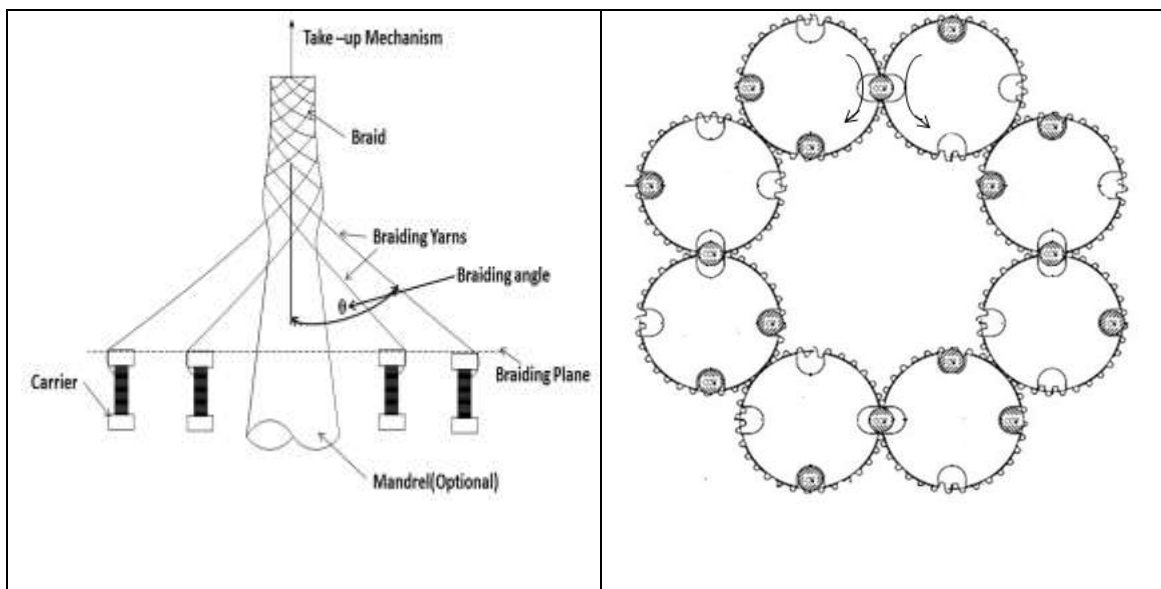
Left: Braiding machine showing spools and yarns that are transported on carriers on a horizontal track surface (not shown) to form a yarn. Right: Circular spur gear train. Each spur gear has a slotted horn gear plate rigidly attached. The figure shows how carriers with end stubs (represented a dark circles in the slots) are passed from one gear to the next via attached and slotted horn gears.
